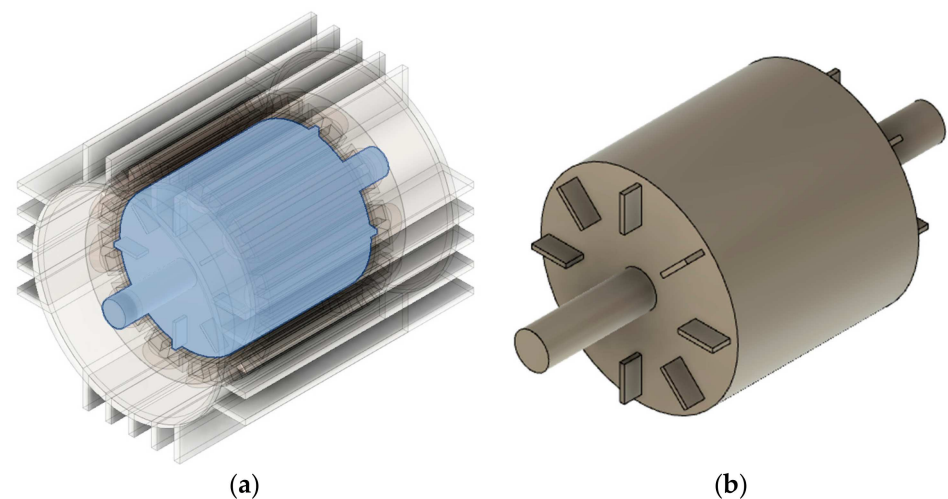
Topology of an EFC machine with rotor-mounted wafers. (a) EFC machine with rotor-mounted wafers and (b) Shaft design.
